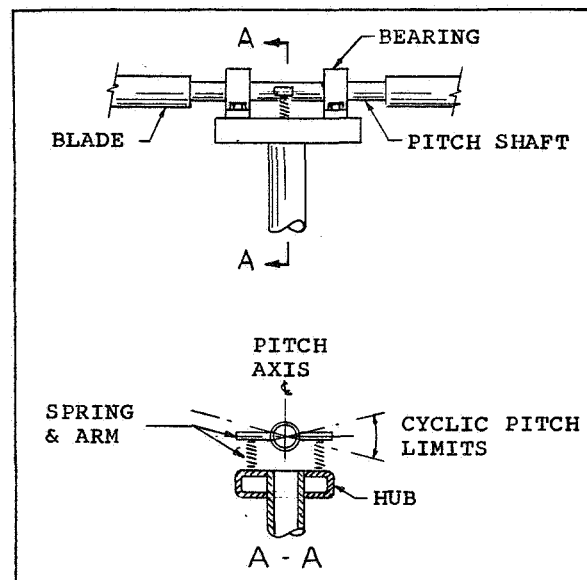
Balanced-pitch rotor having two blades and fixed collective pitch.
